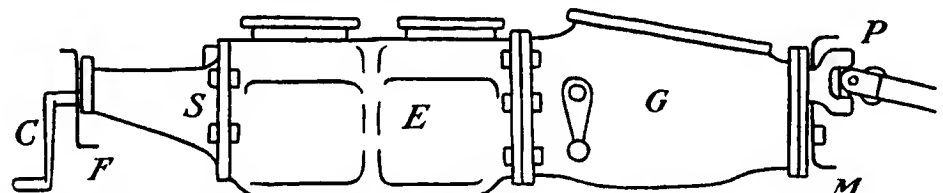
ASSEMBLED CASTINGS OF CRANKCASE AND GEAR BOX OF PRIMA CAR.
